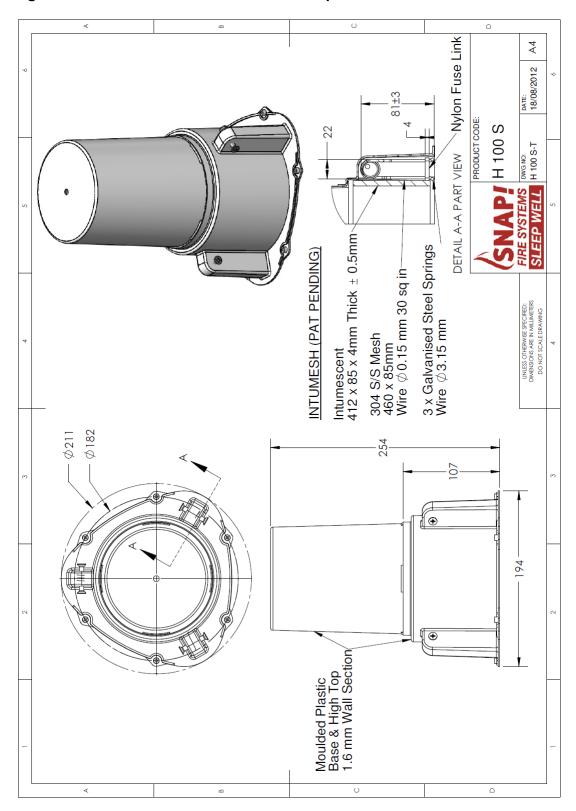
H 100 S Cast-in Collar installed in specimen No. 5
